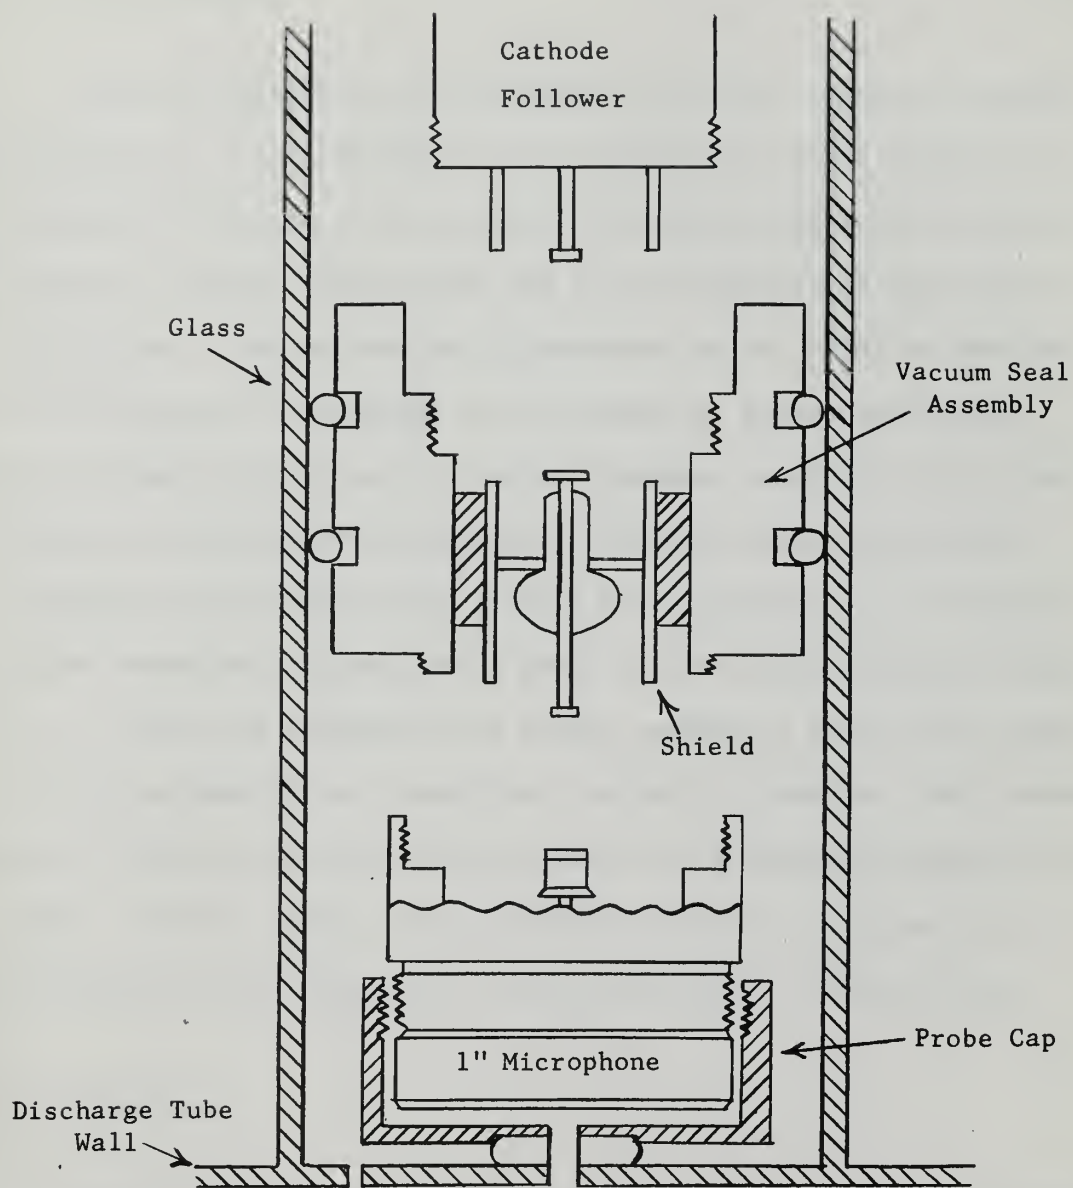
Details of 1" microphone mounting, vacuum seal assembly and extension
